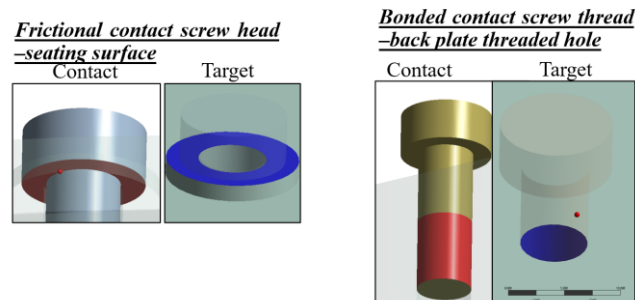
Frictional contact between screw head and seating surface (left)- Bonded contact between bolt thread and back plate threaded hole
